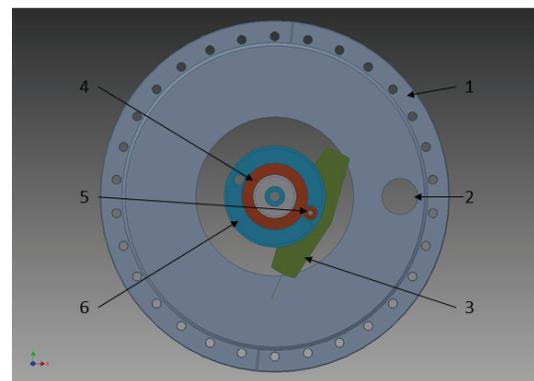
A 3D rendering of the gears setup. (1) - vacuum flange; (2) - beam pipe; (3) - blade with attached carbon wire; (4) - stationary gear G_1 ; (5) - rotating gear G_2 ; (6) - rotating gear box.
